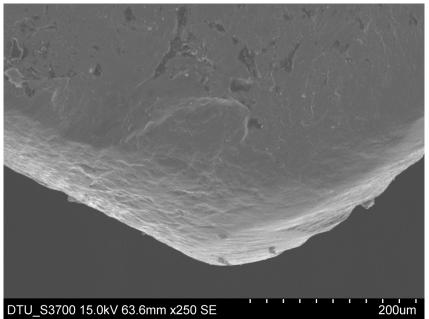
SEM(Scanning Electron Microscope) image of Tool wear of CNT coated tool
